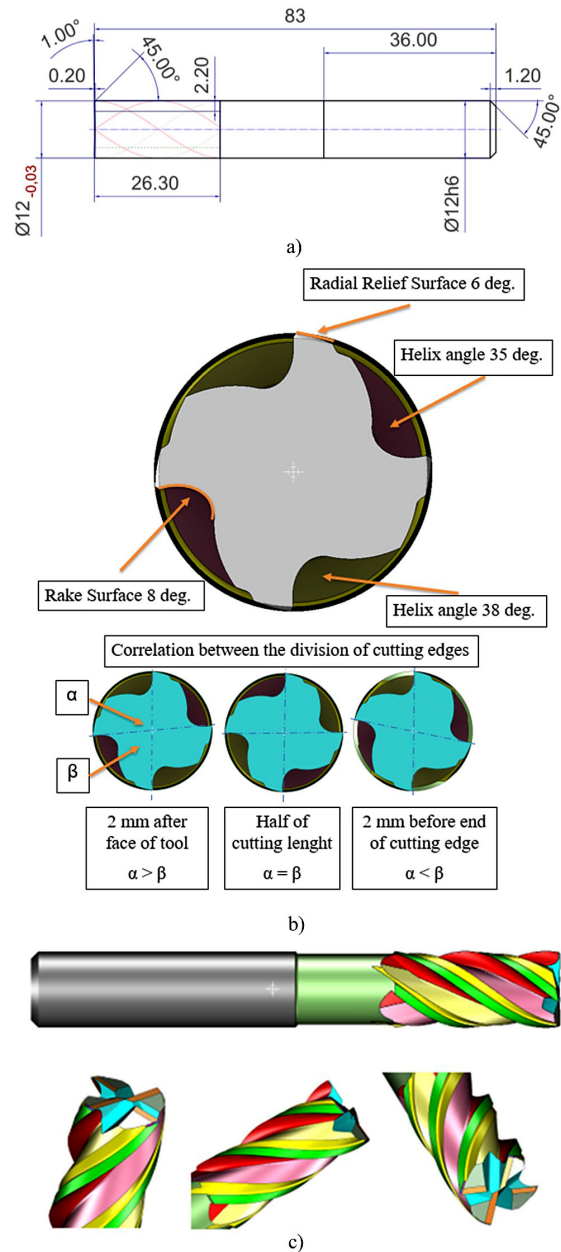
Technical drawing of the milling cutters used in the tests. (a), geometric parameters of the milling cutters used in the tests (b), visualisation of the designed milling cutter (c)
